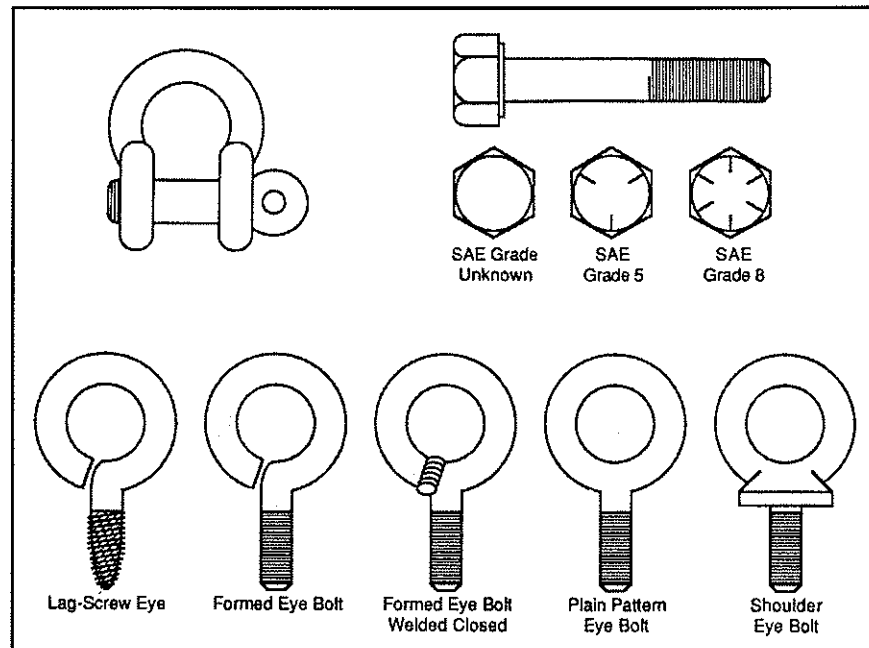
Typical mounting hardware screw pin anchor shackle (top left), straight bolts (top right), and eye bolts (bottom). Drawing courtesy of JBL, Inc.
